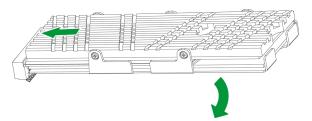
Inserting the M.2 Heatsink Assembly and Pressing it Down
